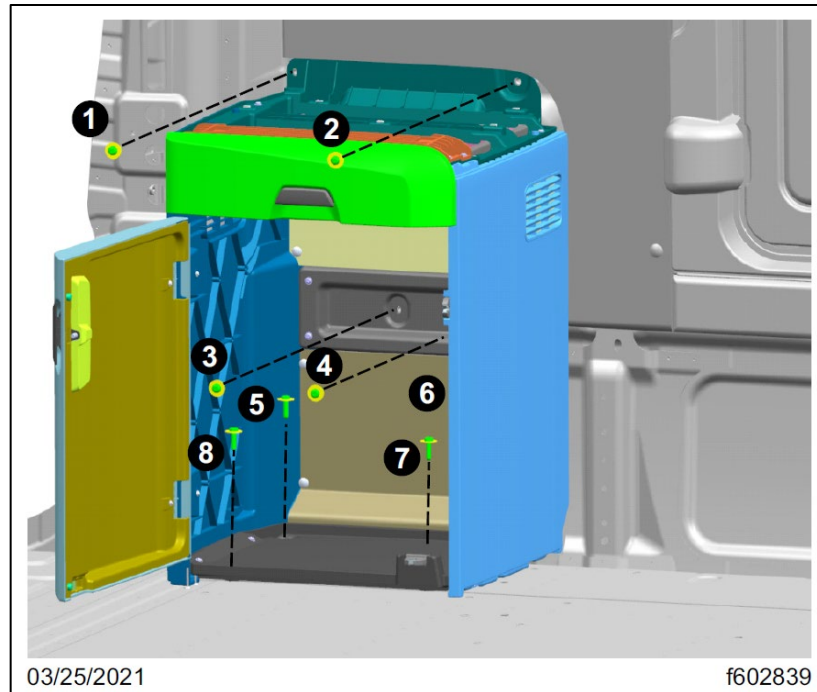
, Fasteners That Attach the Refrigerator Cabinet to the Cab with Tightening Sequence
